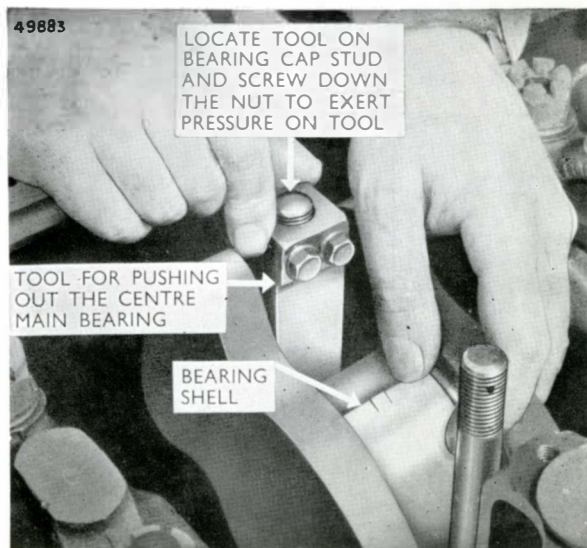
REMOVAL OF MAIN BEARING SHELL
